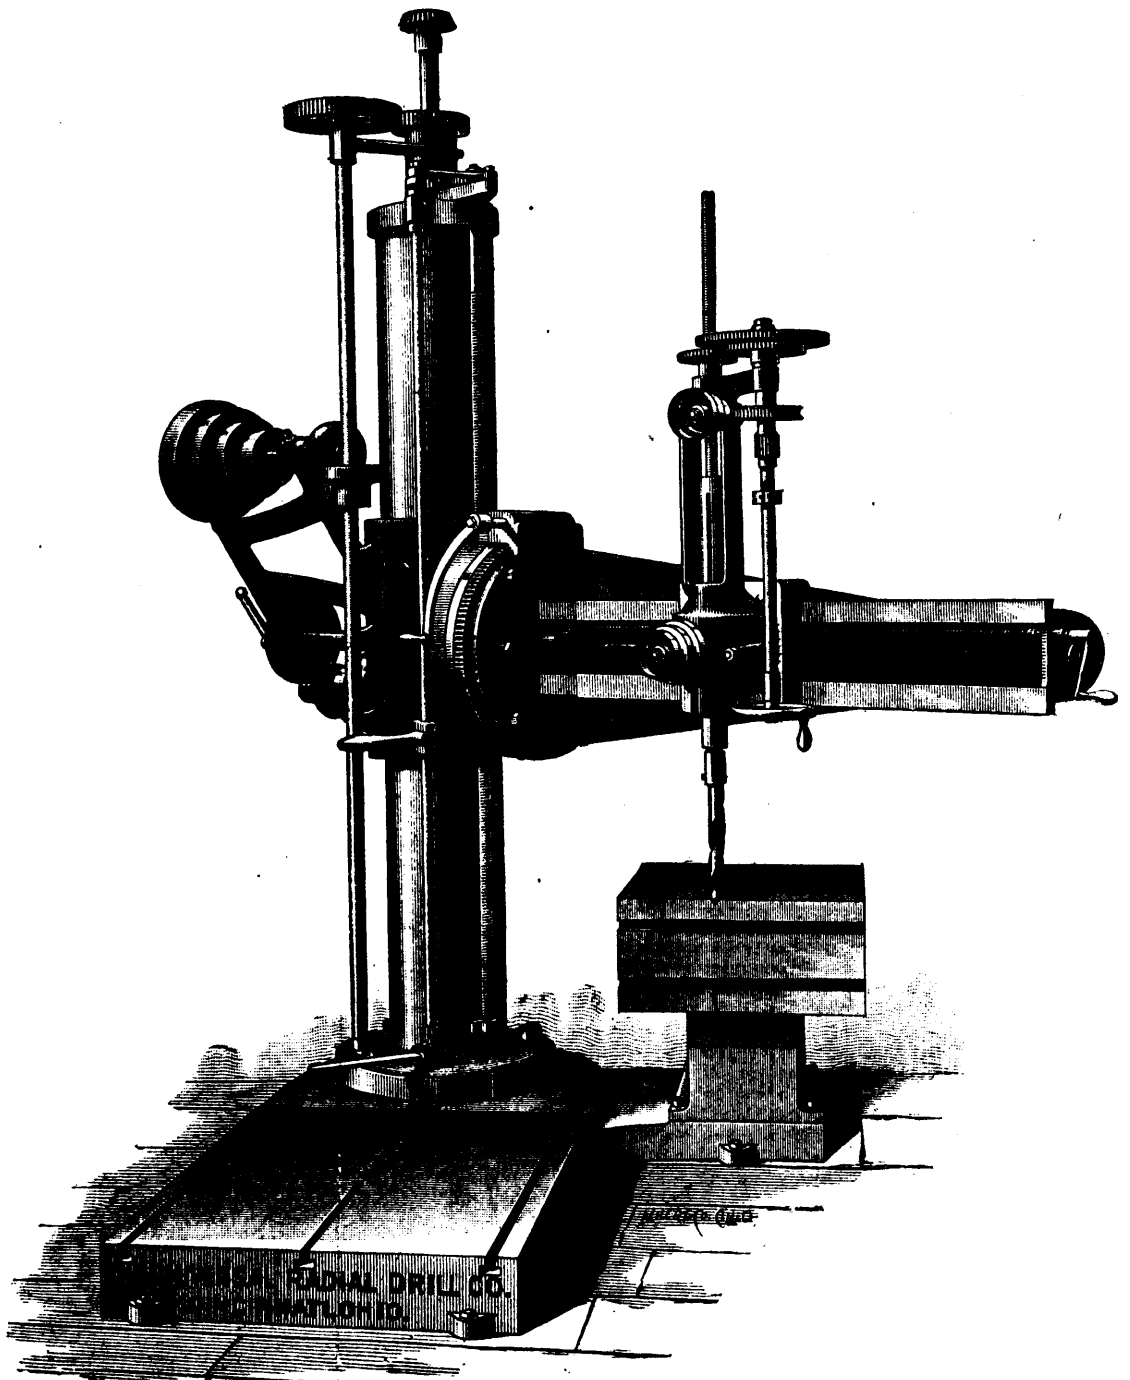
UNIVERSAL DRILLING MACHINE.
